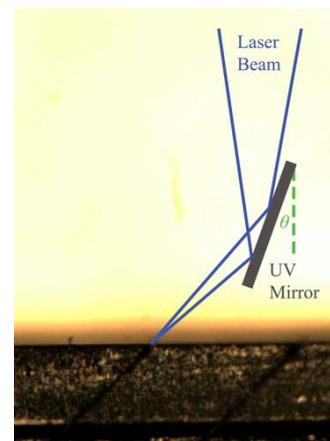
Schematic diagram illustrating a reflected laser beam, superimposed on an optical image showing laser micro-machined oblique cutting
